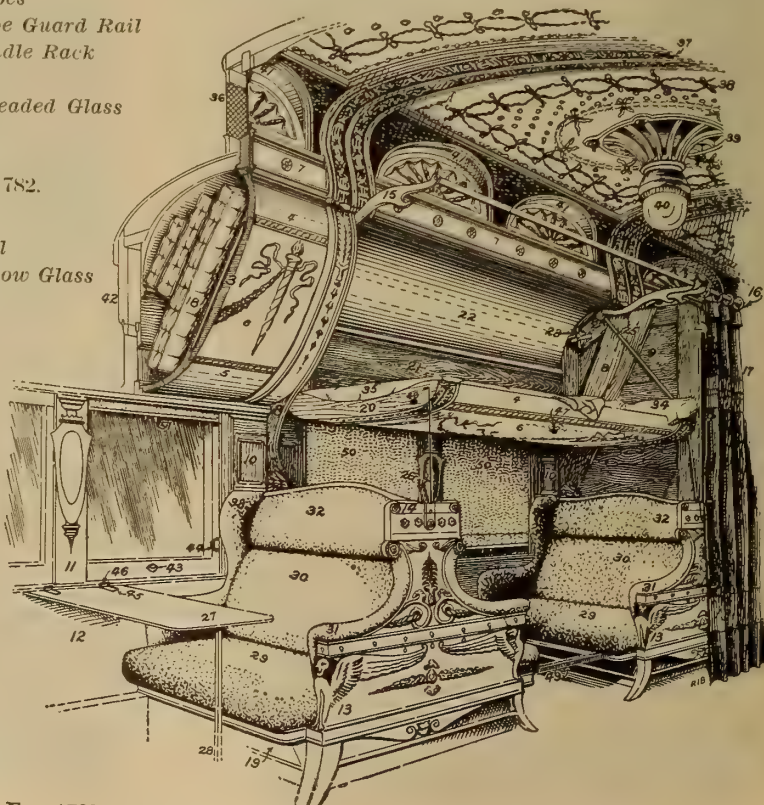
PERSPECTIVE VIEW OF A SECTION OF A SLEEPING CAR, THE UPPER BERTH PARTLY MADE UP.
